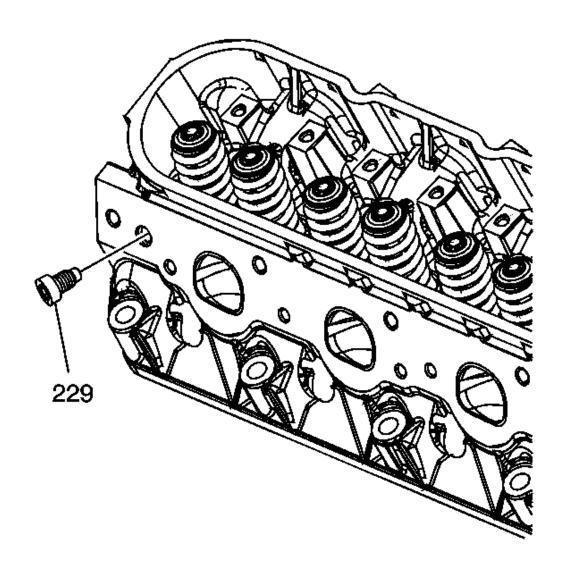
Locating Coolant Plug Courtesy of GENERAL MOTORS CORP.
